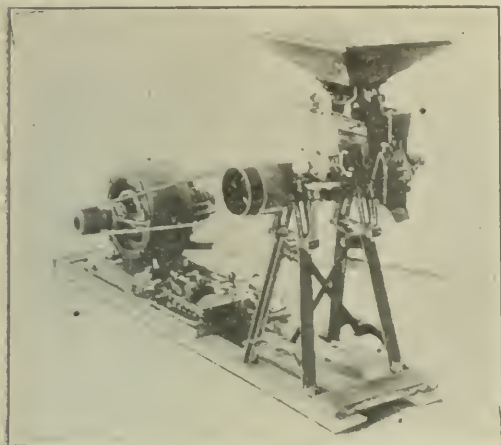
"Northern" motor driving No. 6 duplex corn mill.
